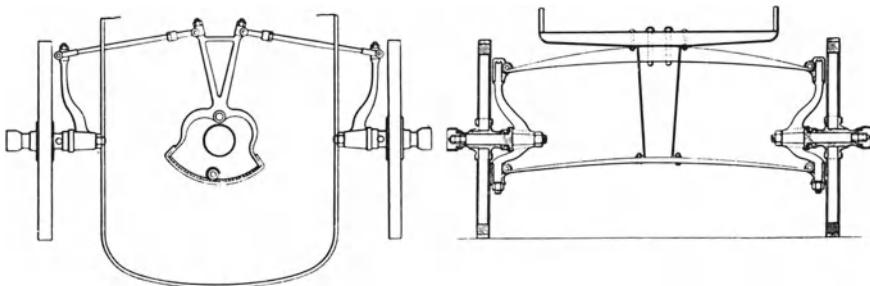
Drawing of the front steering axle of the 1878 Bollée Mancelle; the independent double wishbone suspension with transverse double leaf springs is clearly shown (redrawn from Baudry de Saunier 1900)
